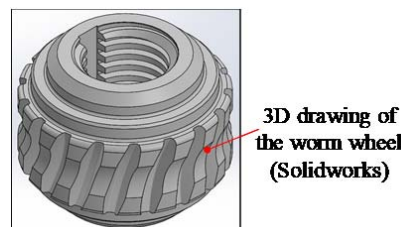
Design process of the worm wheel, showing the 3D drawing obtained by using the SolidWorks software
